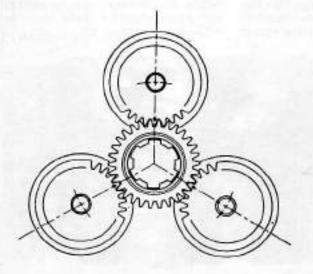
Planet gears must be timed as shown with punch marked tooth of each gear pointing to sun gear.
